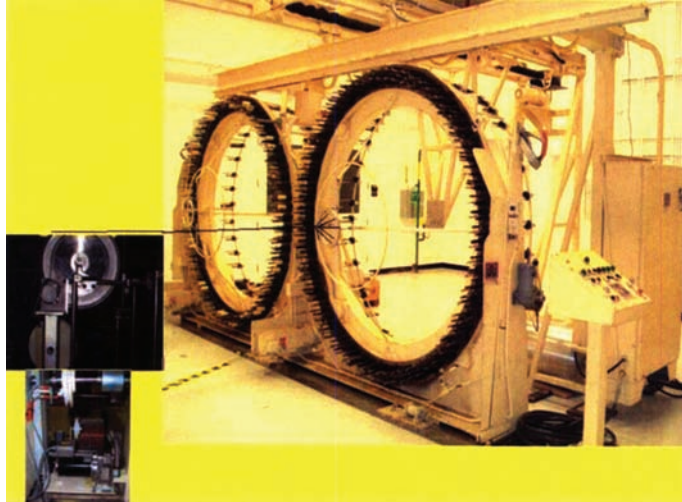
Composite and tether braiding machine installed at MSFC PRL.
